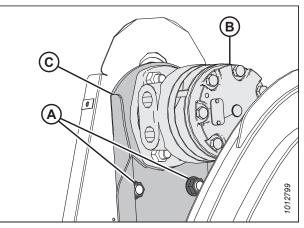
Single-Reel Drive Shown – Double-Reel Drive Similar
